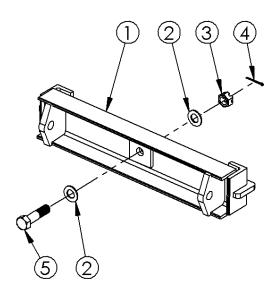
Swivel Plate Assembly TABLE 2-4 – Swivel Plate Assembly, Parts List
